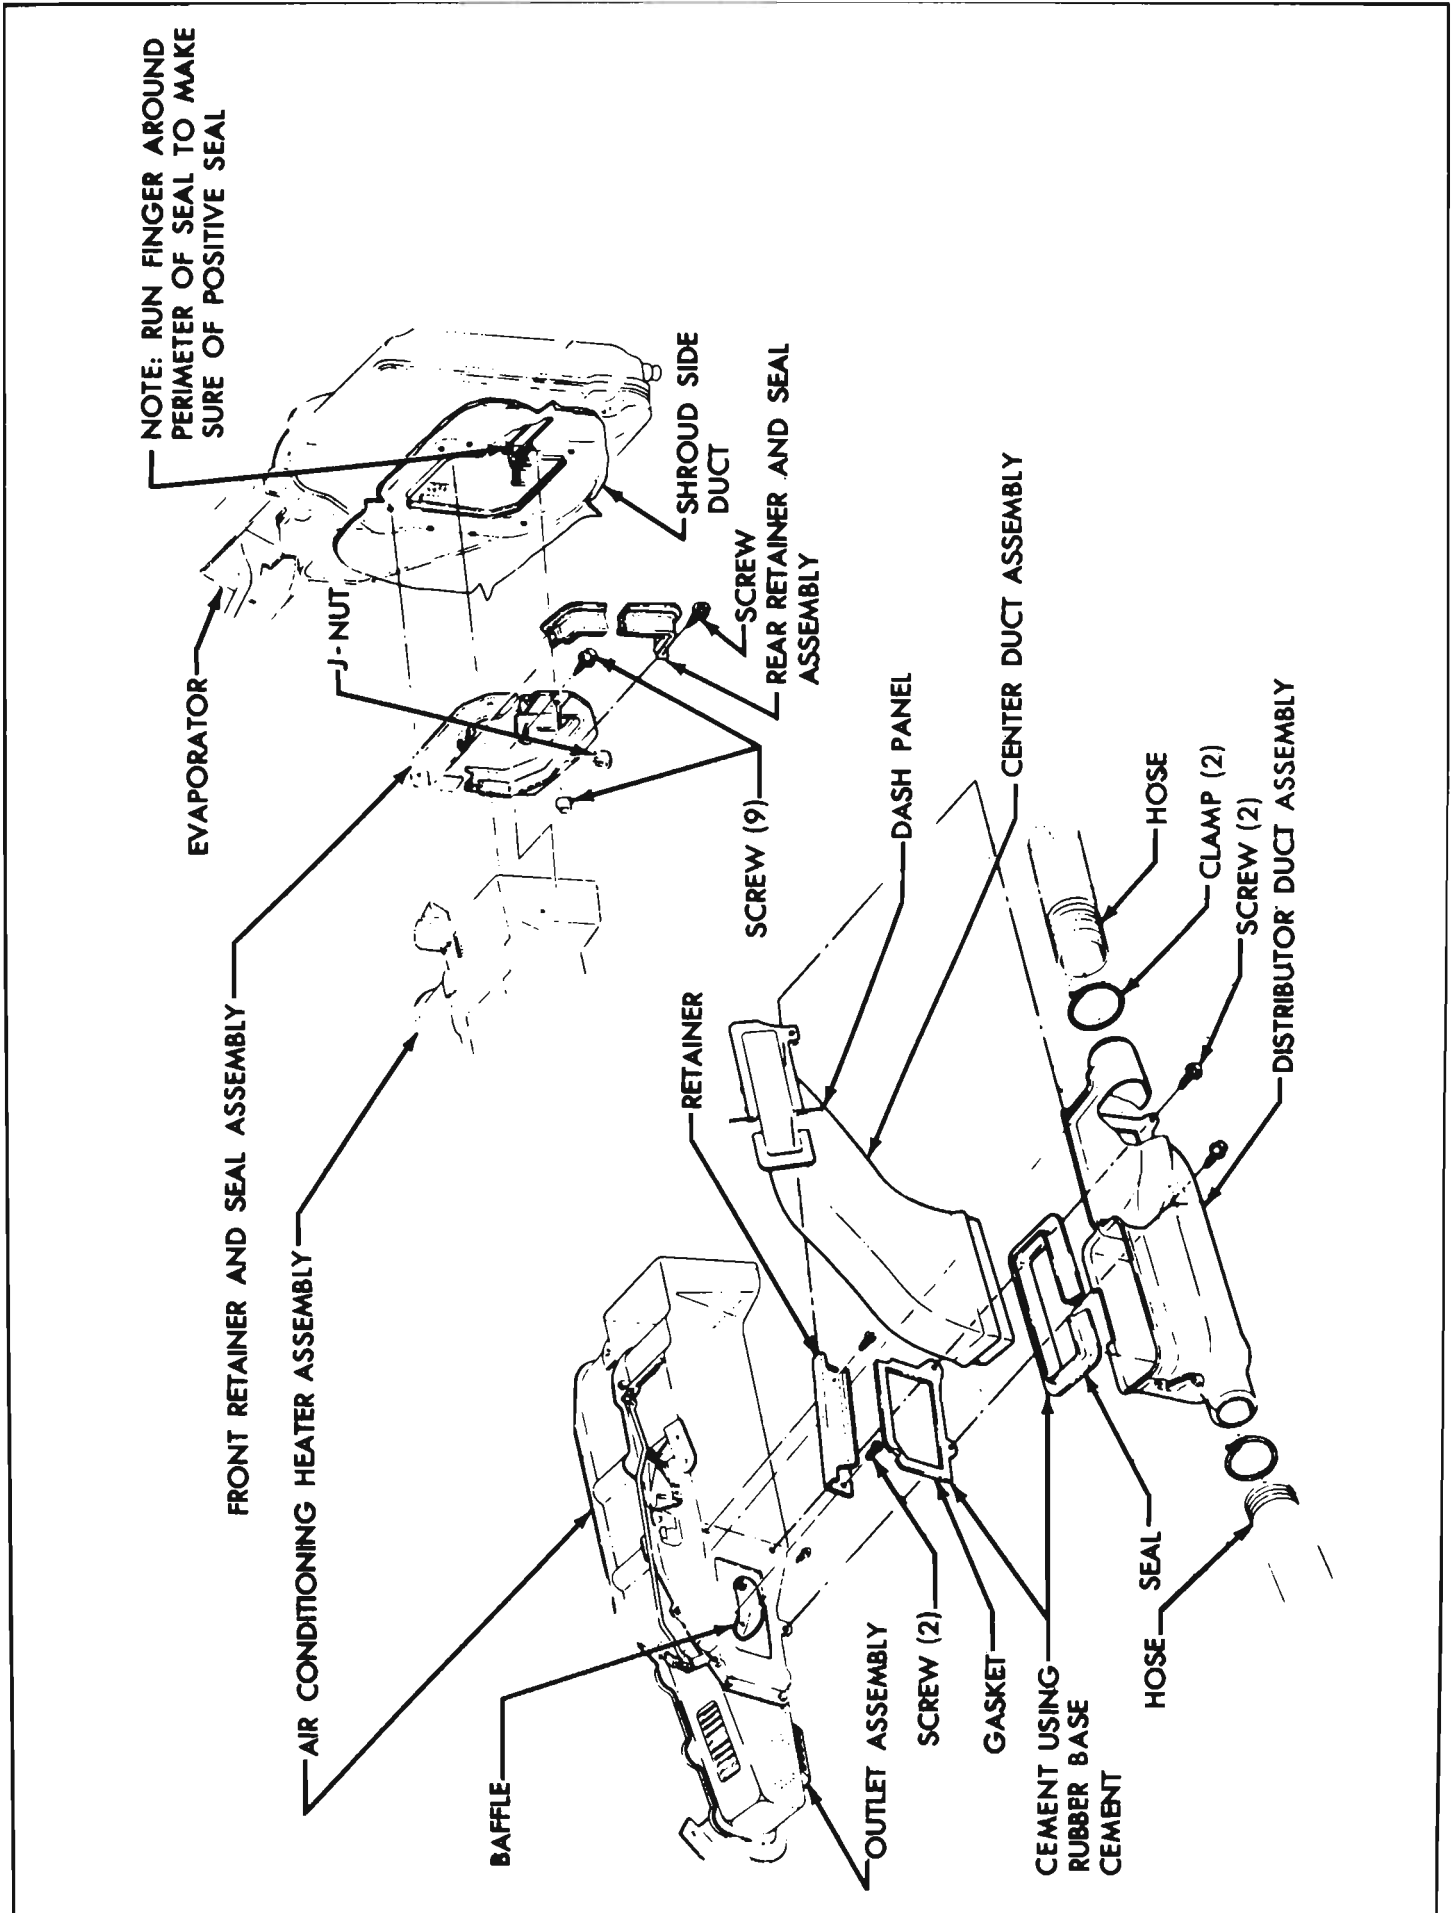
Distributor Duct Assembly, and Front Retainer and Seal Installation
